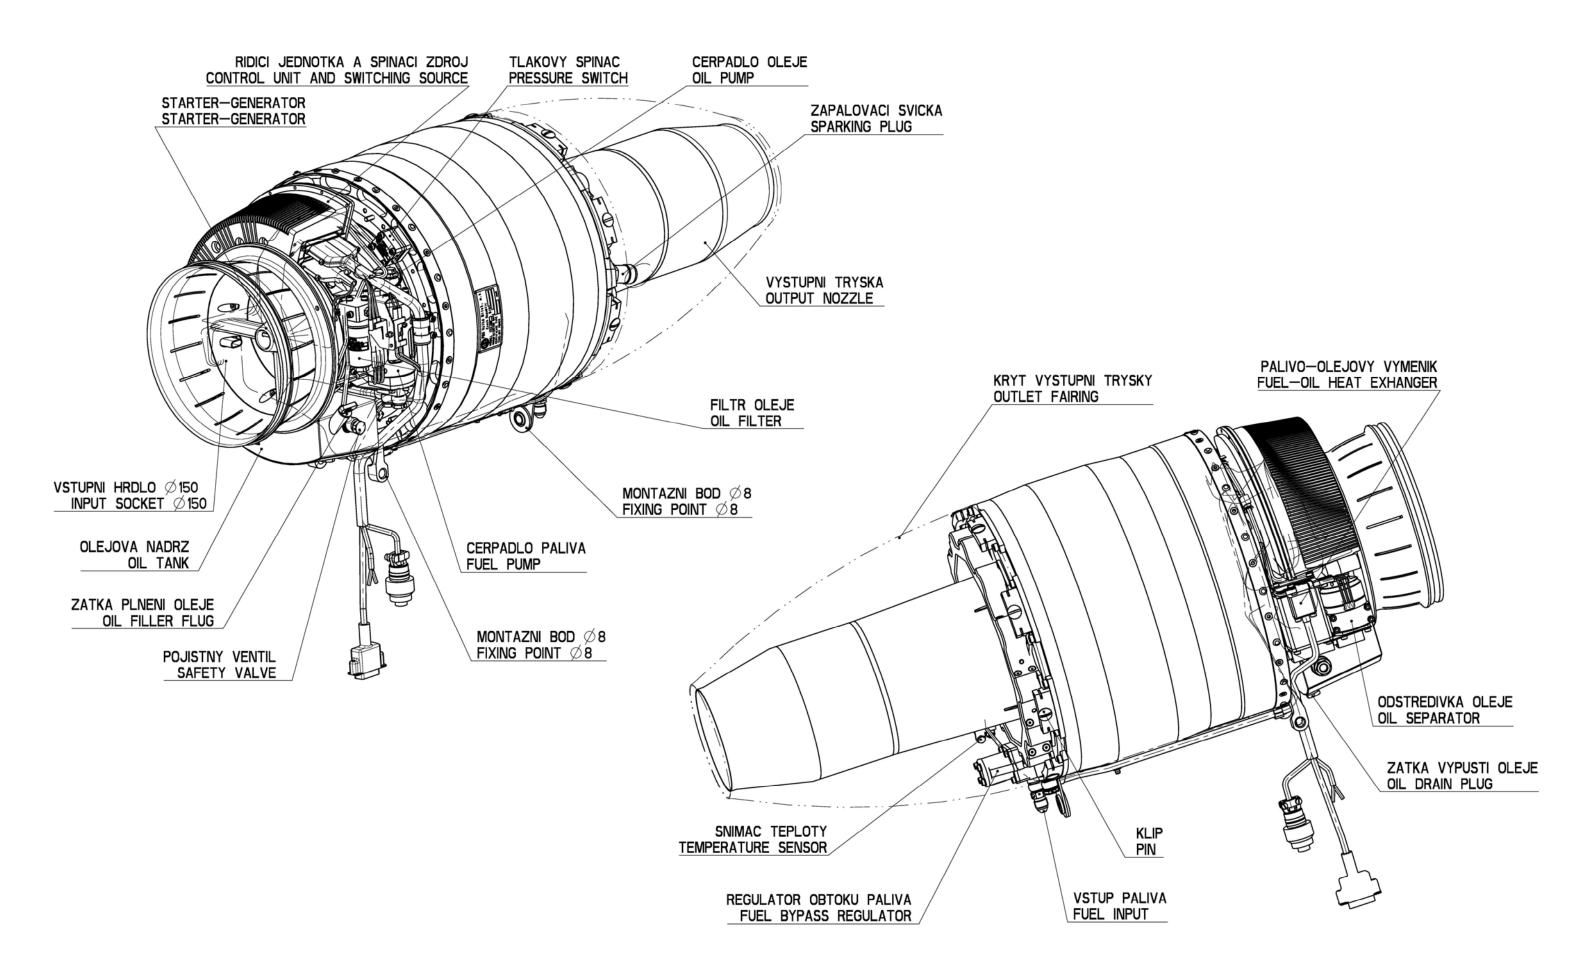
Turbojet engine TJ 100 (without inlet and outlet fairings)
